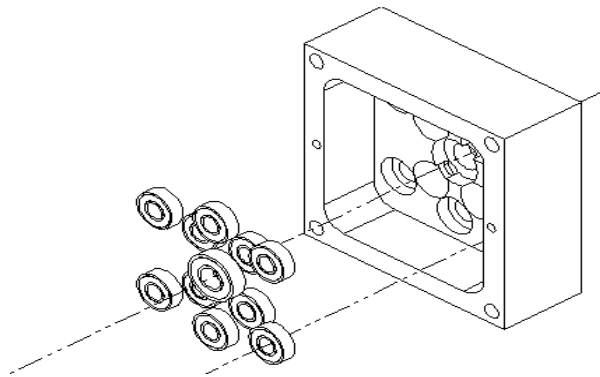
Insert each of the bearings in to a proper slot shown in the figure above make sure that the bearings are in good shape.
